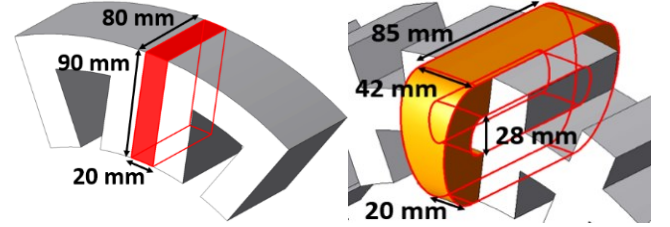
Magnet and field winding dimensions in FSPMM and WFFSM.
